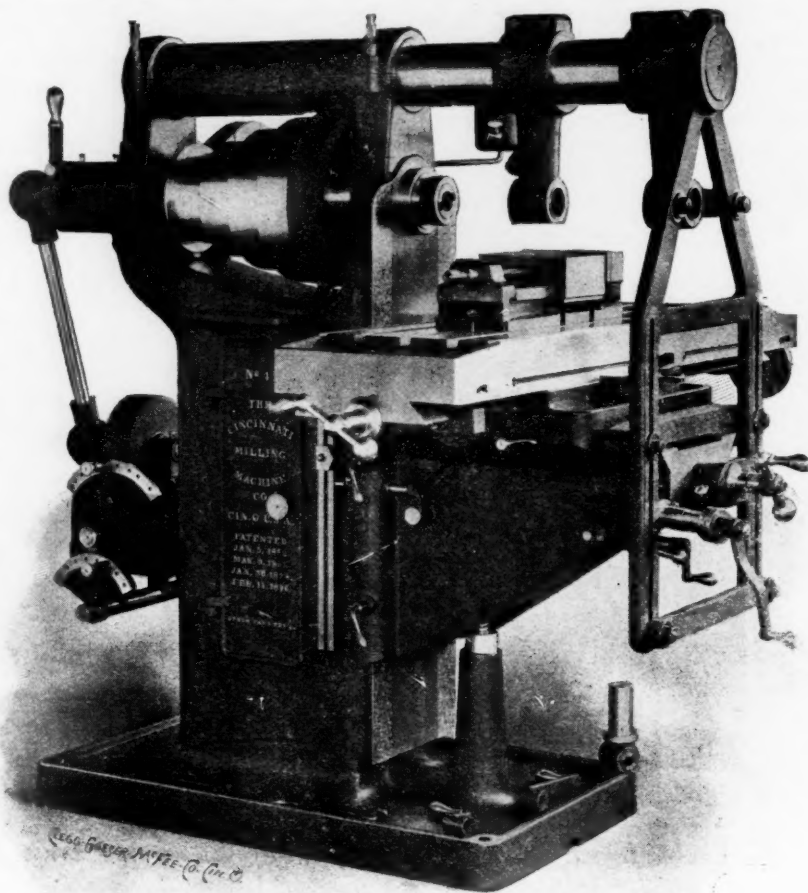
VIEW OF THE NO. 4 CINCINNATI MILLING MACHINE.
